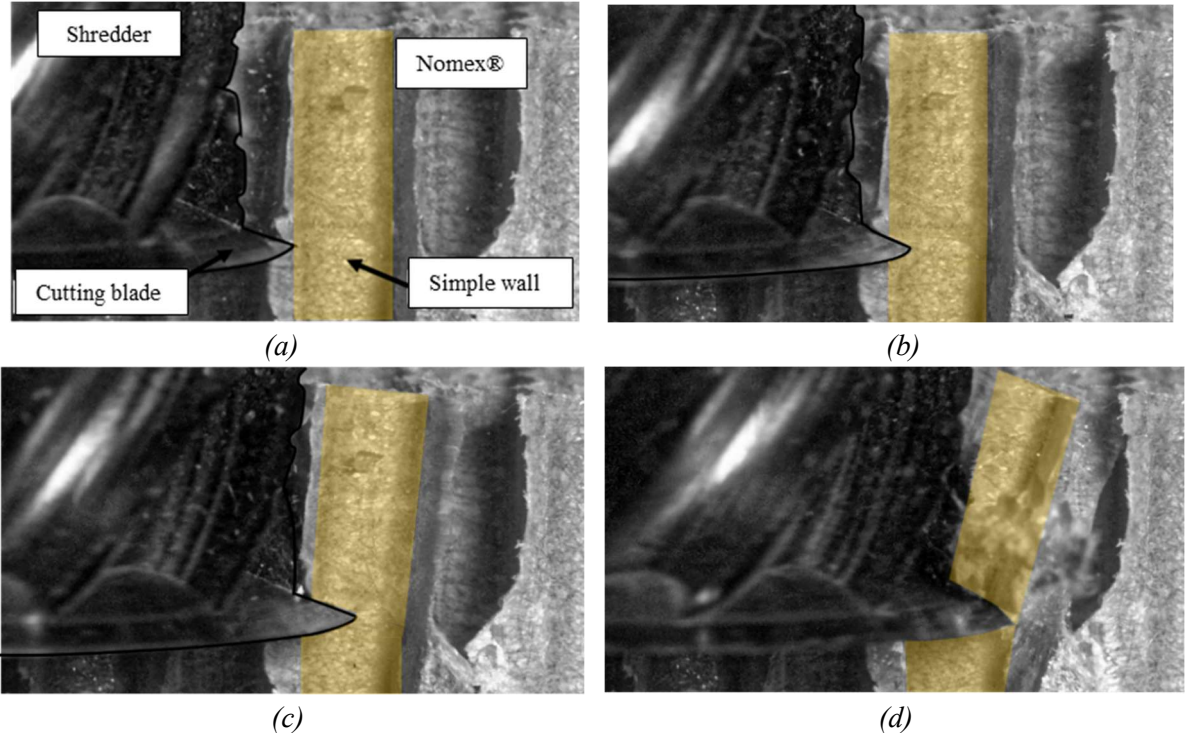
Mechanisms of the chip formation process during machining Nomex®, the selected cutting condition is:  $f=1000$  mm/min and  $N=15000$  rpm.
